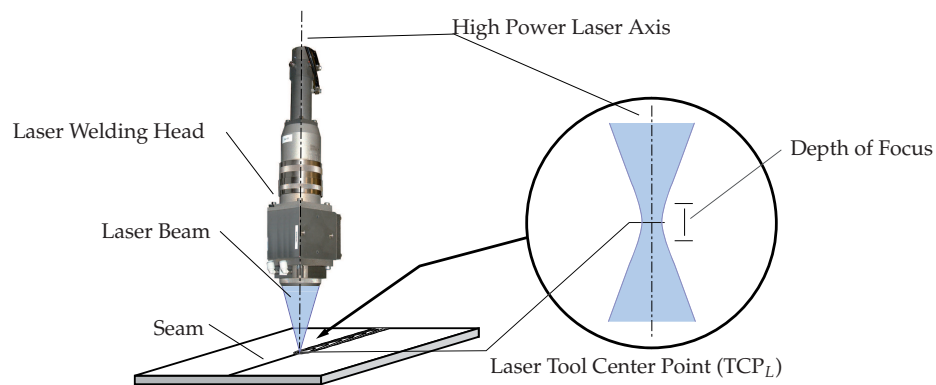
Representation of a laser welding head (standard Trumpf laser head) over a seam and a typical beam focus profile.
